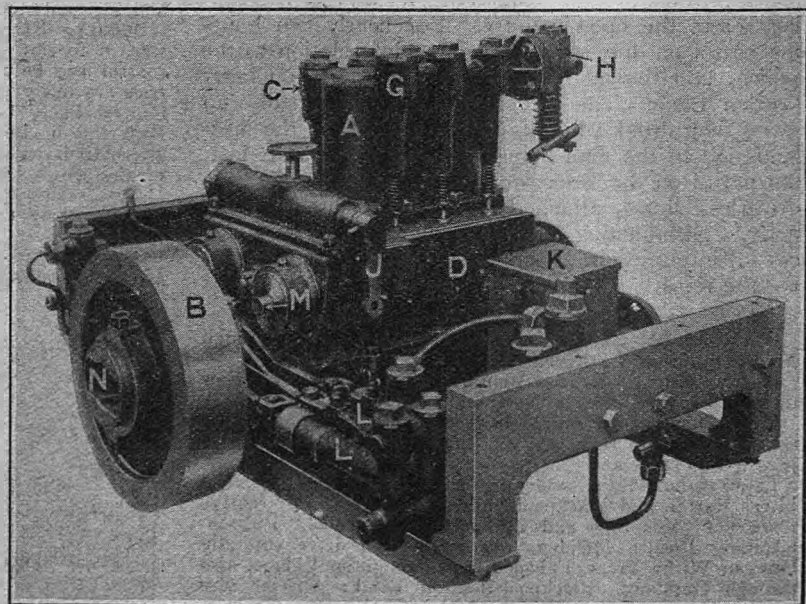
Off-side view of the Pearson-Cox steam engine.
